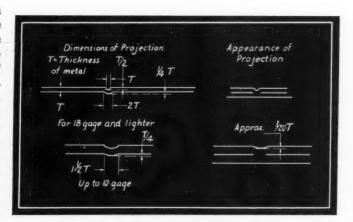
Proportions of a projection decrease after welding, giving an improved appearance to the part
